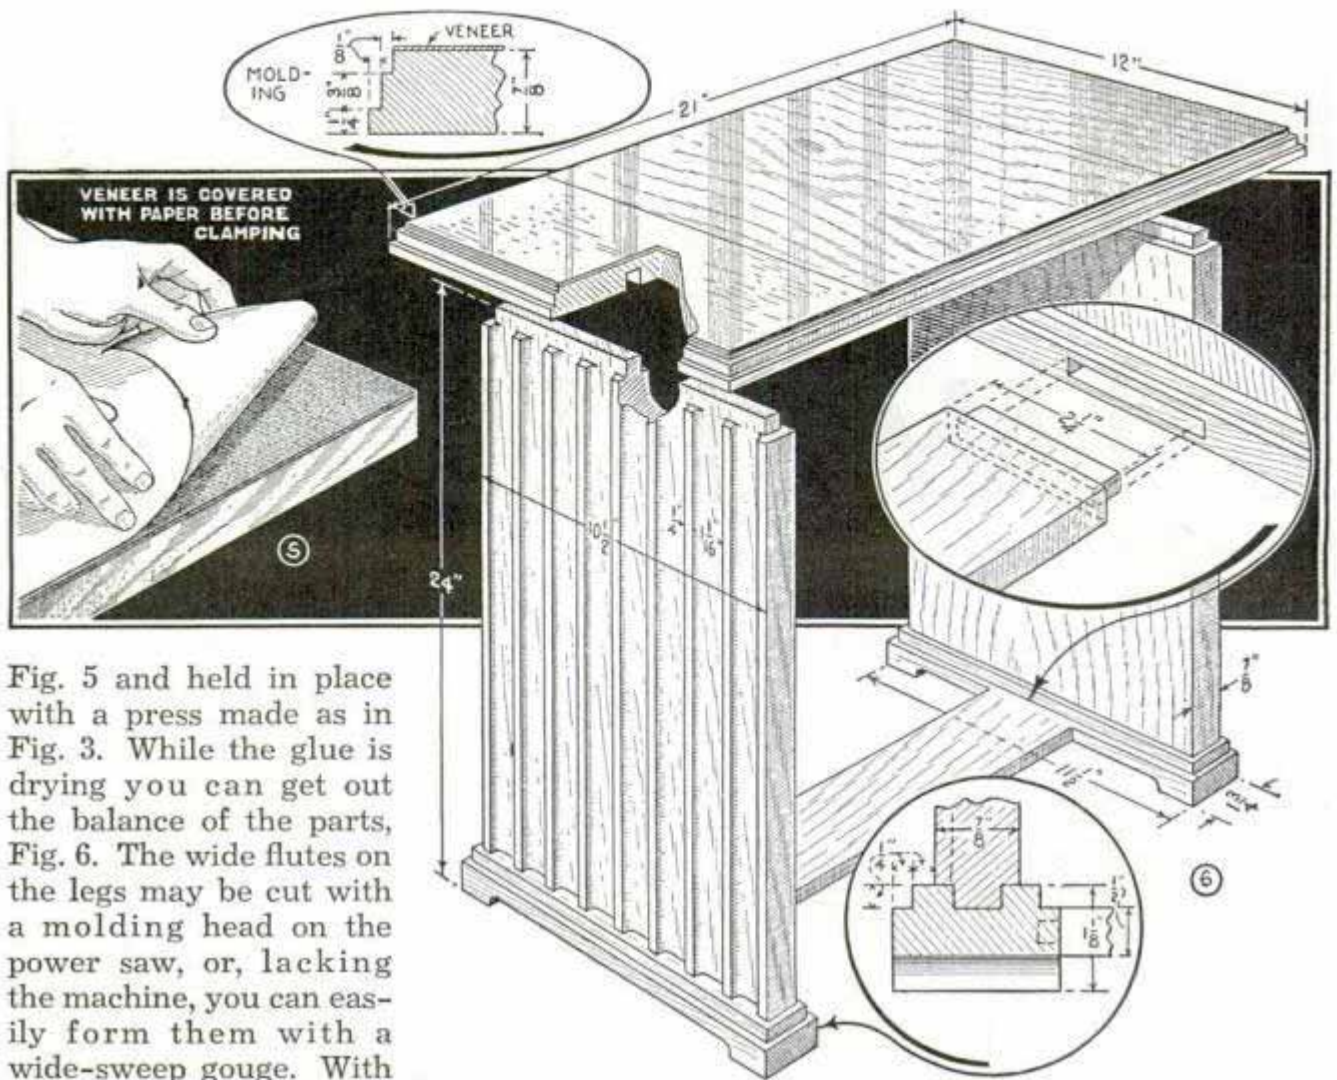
and held in place with a press made as in Fig. 3. While the glue is drying you can get out the balance of the parts, Fig. 6. The wide flutes on the legs may be cut with a molding head on the power saw, or, lacking the machine, you can easily form them with a wide-sweep gouge. With the saw available, tenons are cut on the ends of the uprights and registering stopped grooves in the top and both feet, as shown. Without the machine these parts can be joined with either dowels or screws and glue. Now the top can be squared up to finished size and the edges molded. Fig. 6 suggests one style of molding which is suitable. Other designs could be worked out. This done, and the top
